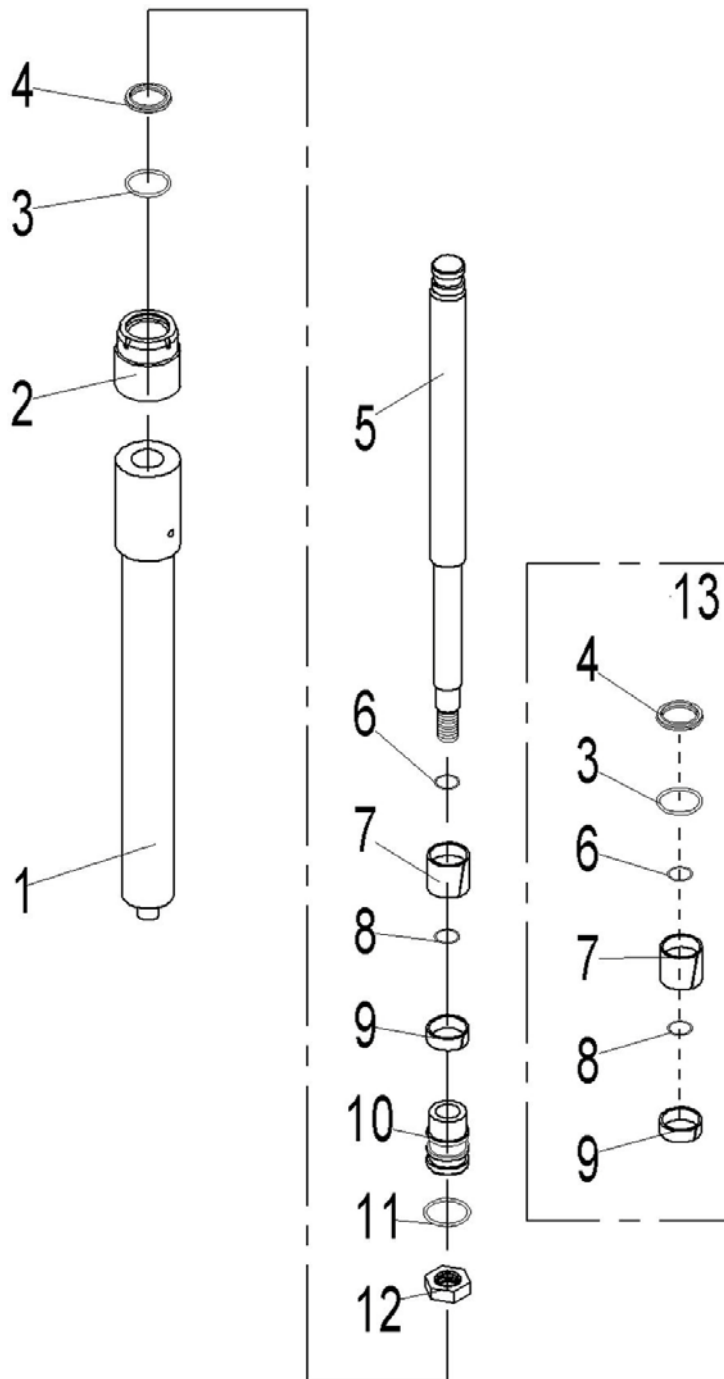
PT 20D Cylinder Assembly (rear1600/2000)
